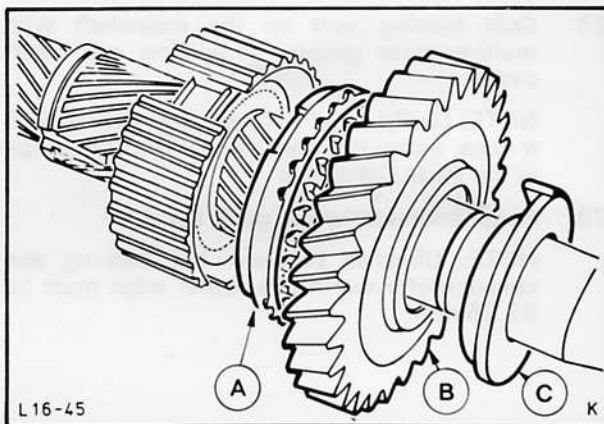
Slide 1st gear with synchroniser ring and oil scoop ring onto mainshaft
